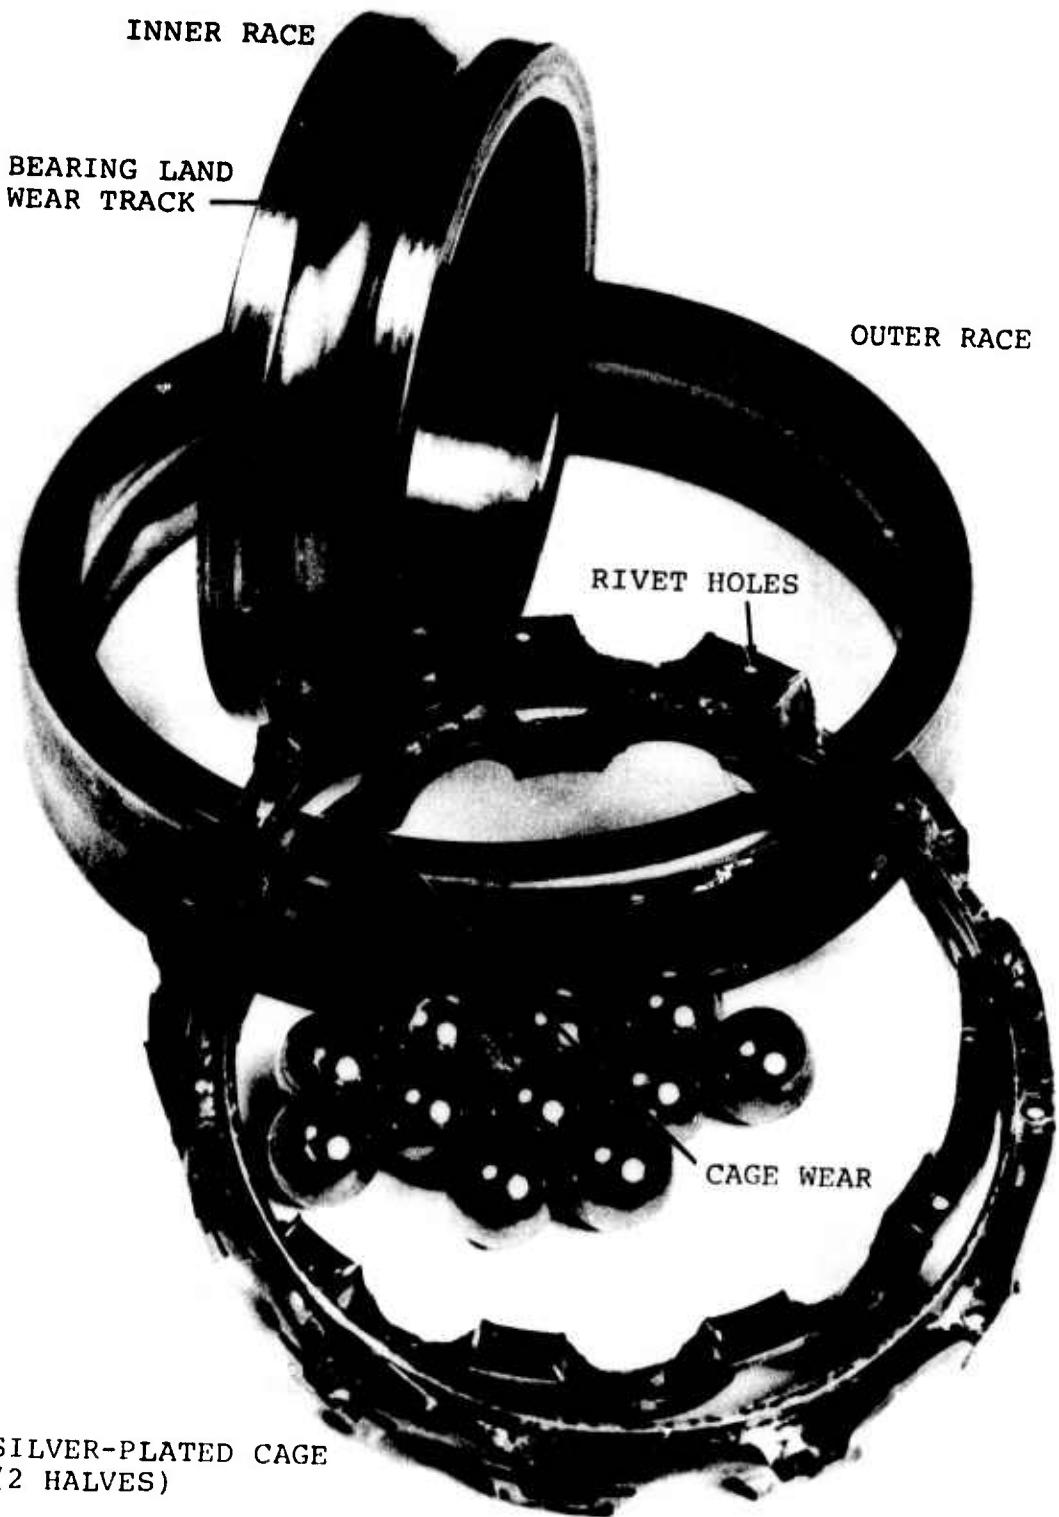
Drive-Shaft Support Bearing S/N 2, Drive End
